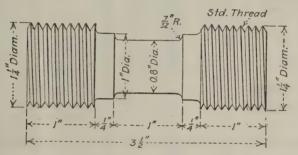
Standard Form of Test Specimen Required for Tension Tests of Gray-Iron Casting Material
